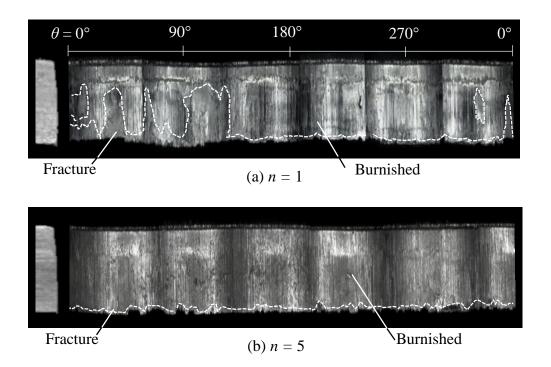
Surfaces of sheared edge of die-quenched steel sheets for automatic centring with moving die for (a) n = 1, (b) n = 5 and v = 75 mm/s.
